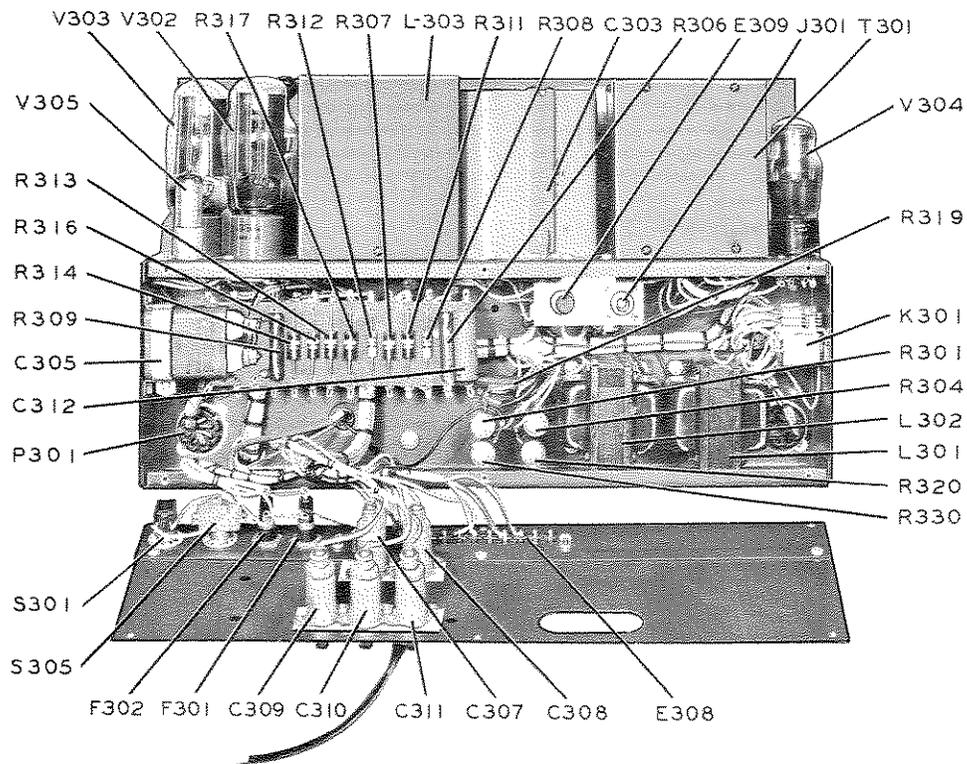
32V-3 Parts Arrangement - Rear Open
